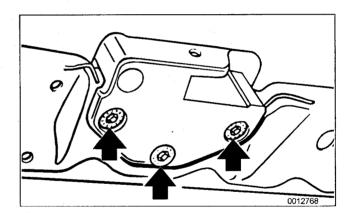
Visor latch plate is held to top of windshield with three bolts (arrows).
